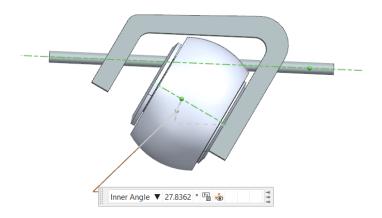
Angle of sheet metal for wheel placement with turning axis
